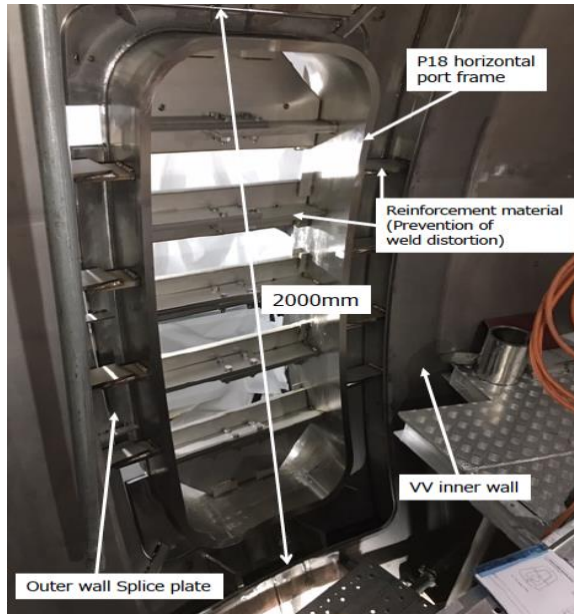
Outer wall splice plates of all six port frames welded
